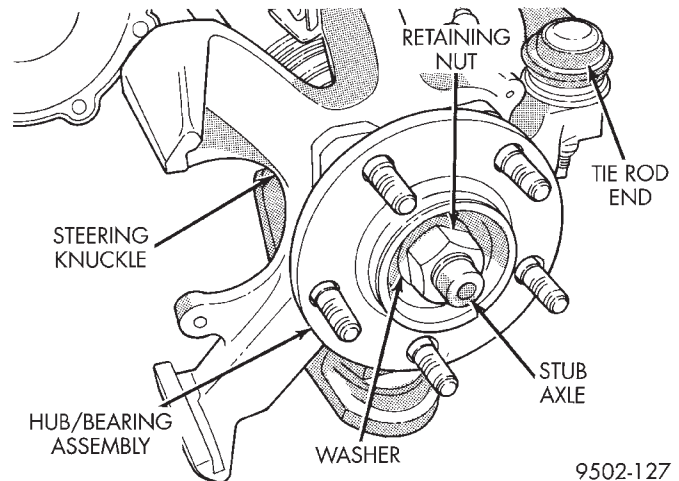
Hub/Bearing To Stub Axle Washer And Retaining Nut
